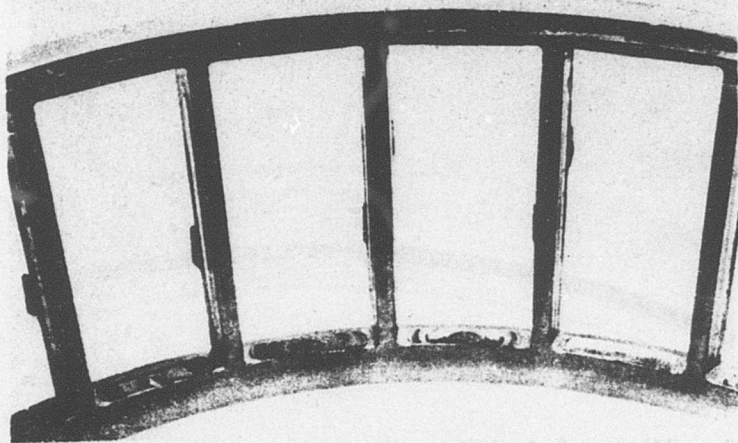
View of Cage Pockets - Bearing S/N 73-69.
